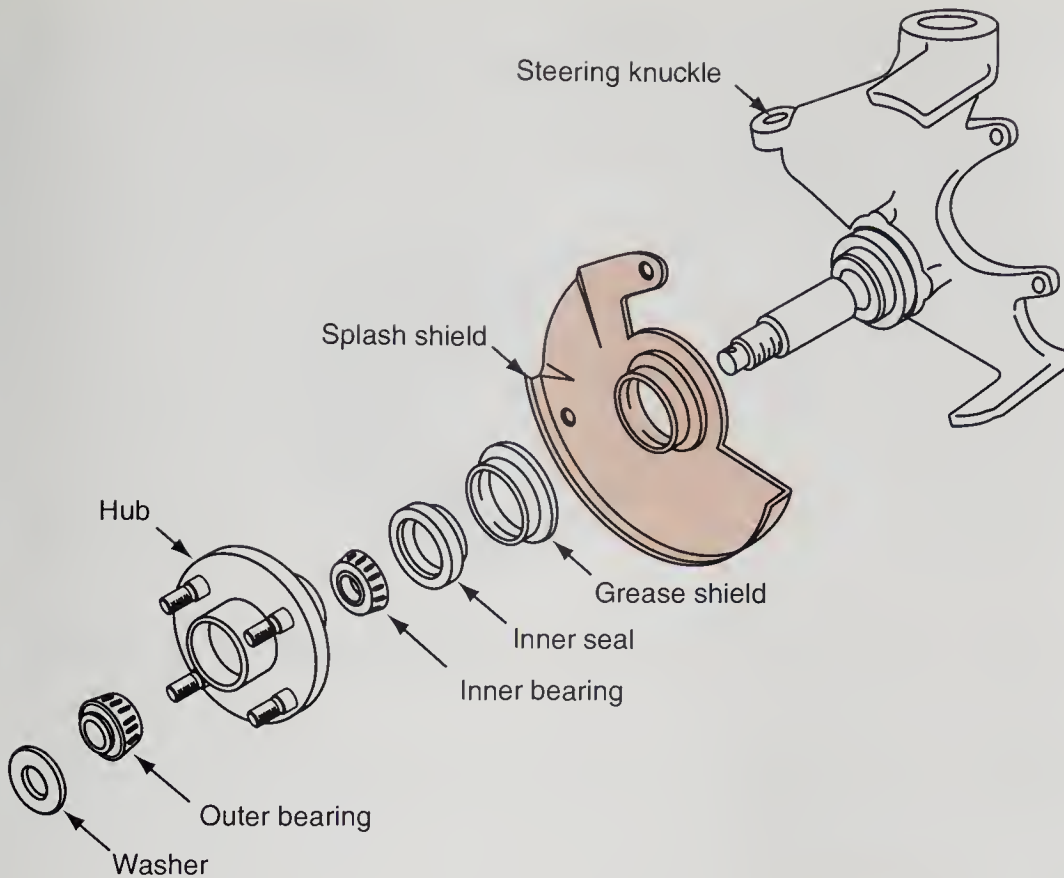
The splash shield is mounted on the steering knuckle inboard of the rotor.
